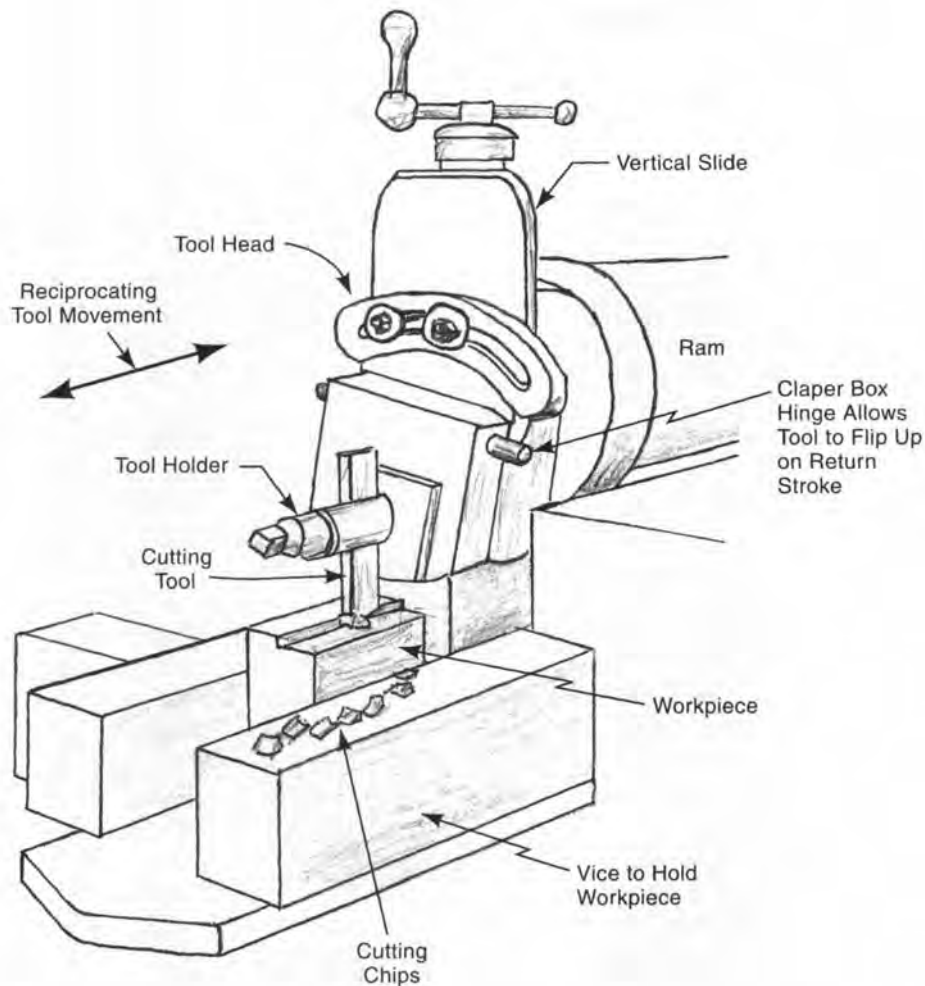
P A shaper makes repeated straight cutting strokes with a single point cutting tool to generate surfaces, slots, and other shapes in a workpiece.
